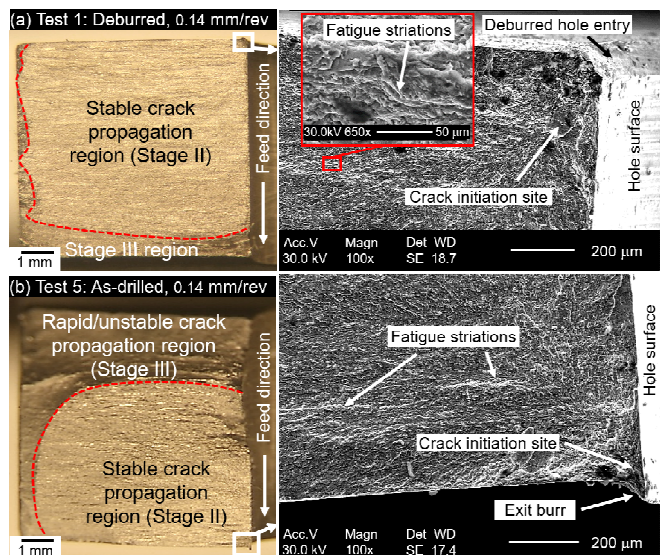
Selected optical and SEM micrographs of fractured surfaces on Ti-6Al-4V fatigue specimens.
